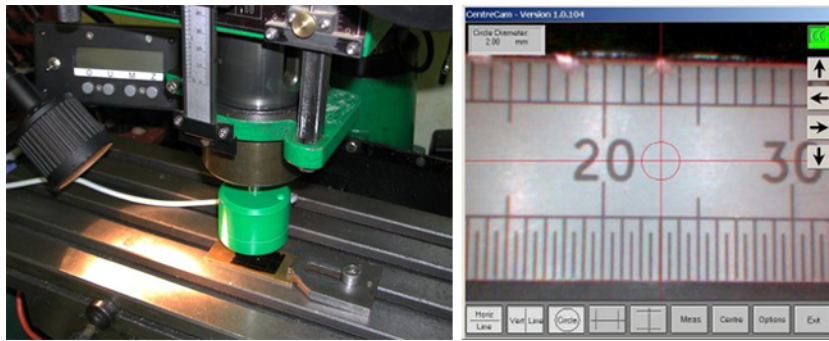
CentreCam: a webcam-based system to improve the technical process accuracy.
